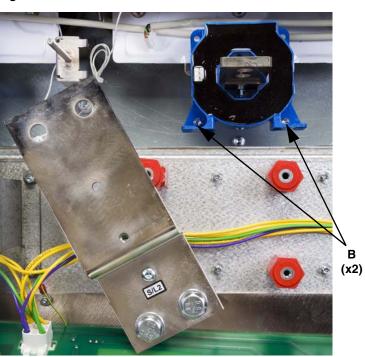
S/L2 Bus Bar and Motor Current Sensor
